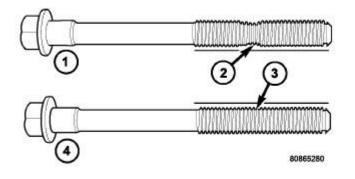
Checking Bolts for Stretching (Necking) Courtesy of CHRYSLER LLC
